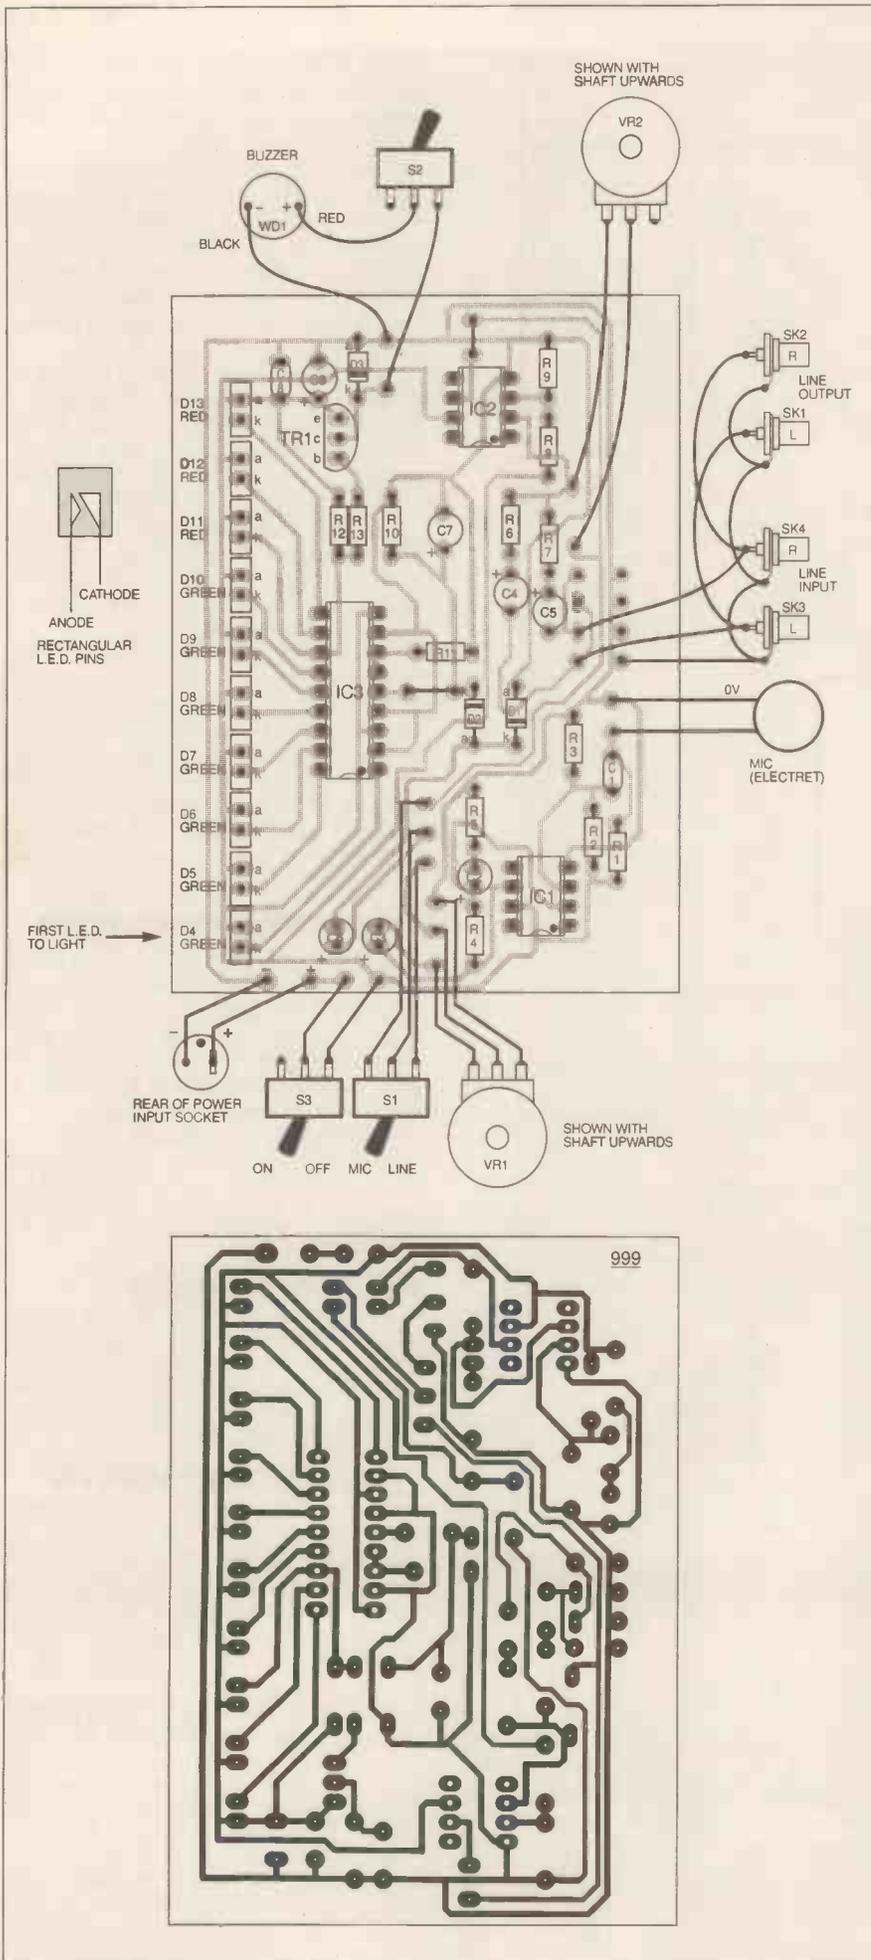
Printed circuit board component layout and full-size underside copper foil track master pattern.
